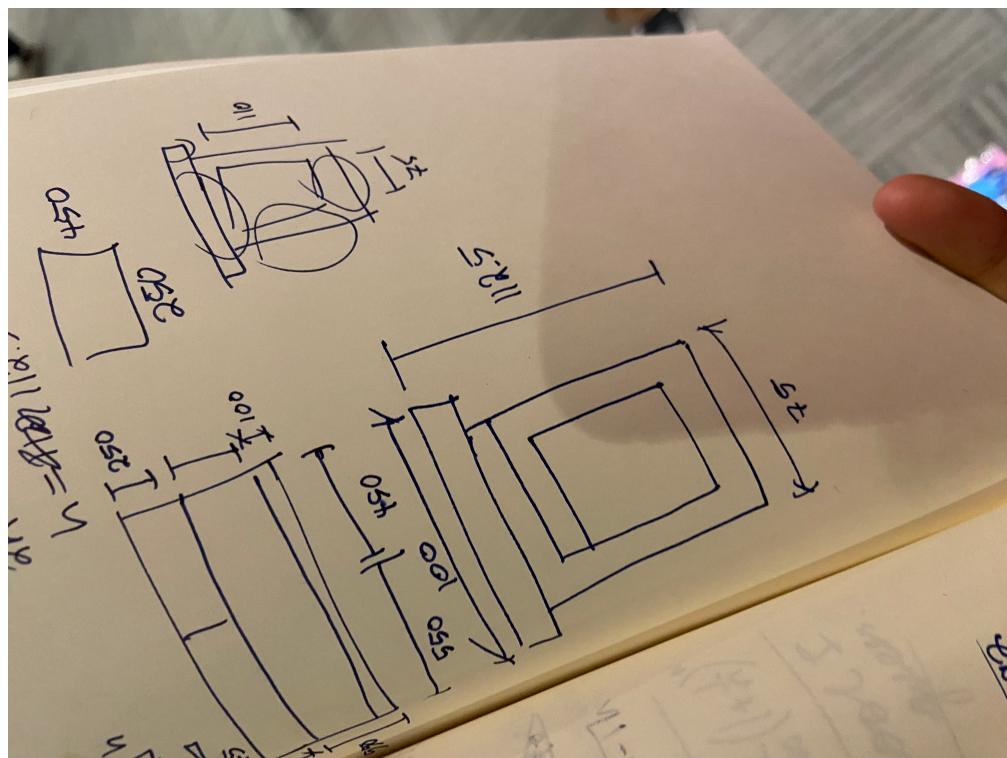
Sketch of cross section - shows the wrapped “cigar” design
